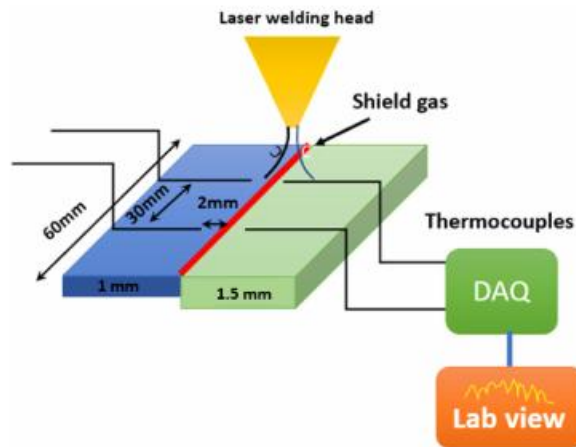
A schematic of the position of thermocouples and piece dimensions.
